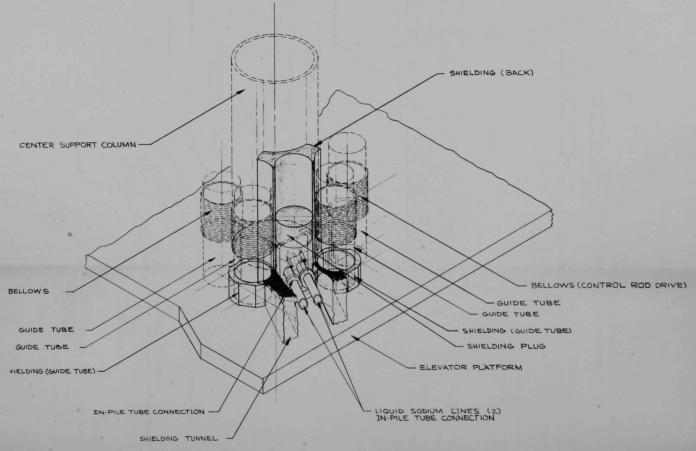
EBR-II Packaged-loop Shielding: Isometric View
